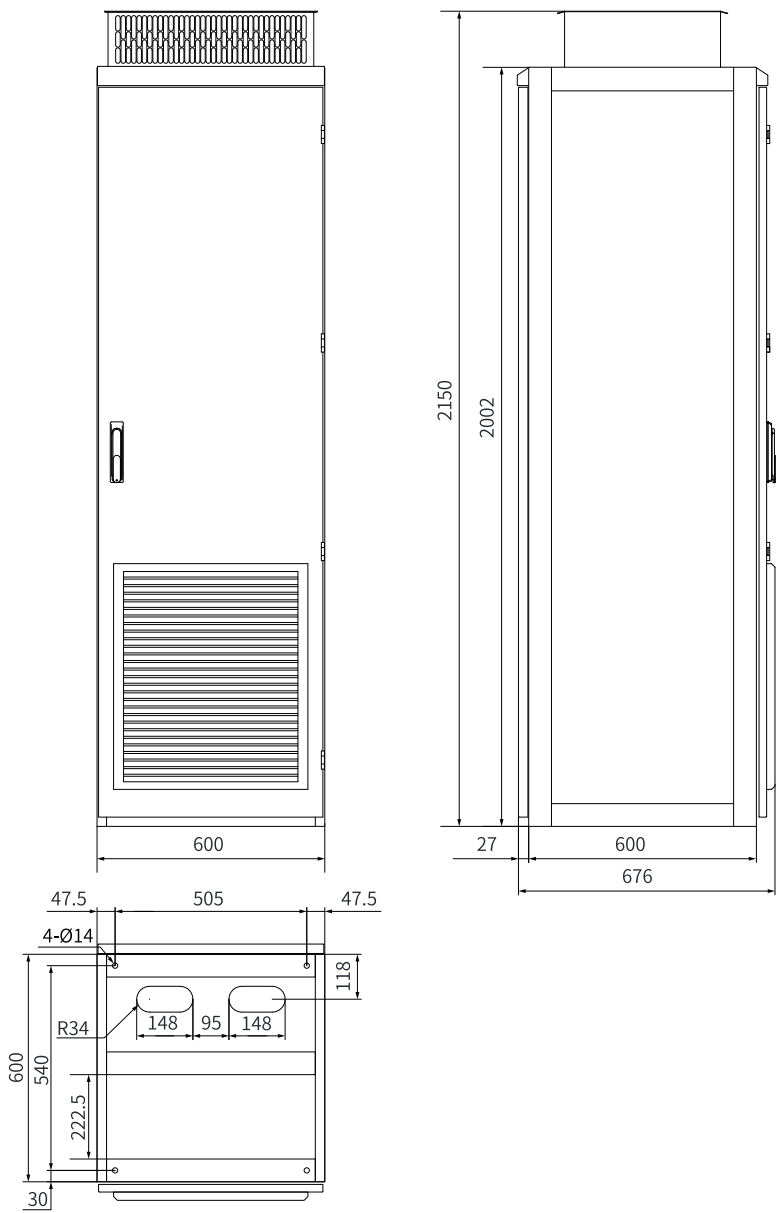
600-mm wide H8 drive cabinet (mm)
